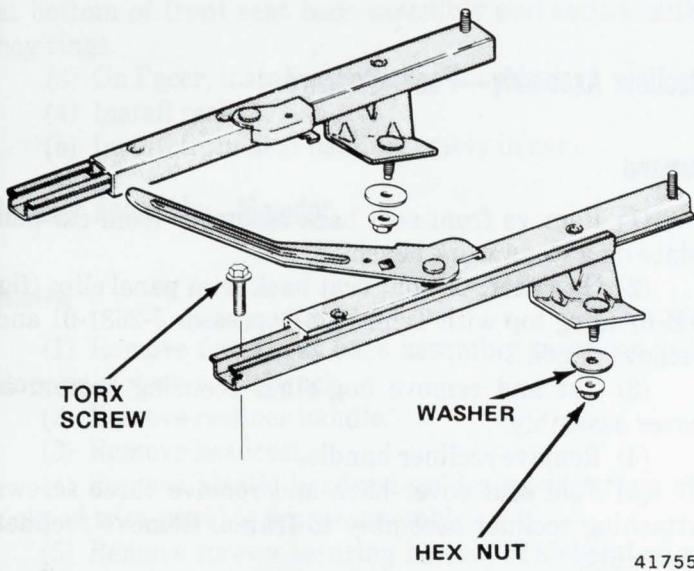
M-3 Front Seat Adjusting Slides—Gremlin-Concord-AMX
